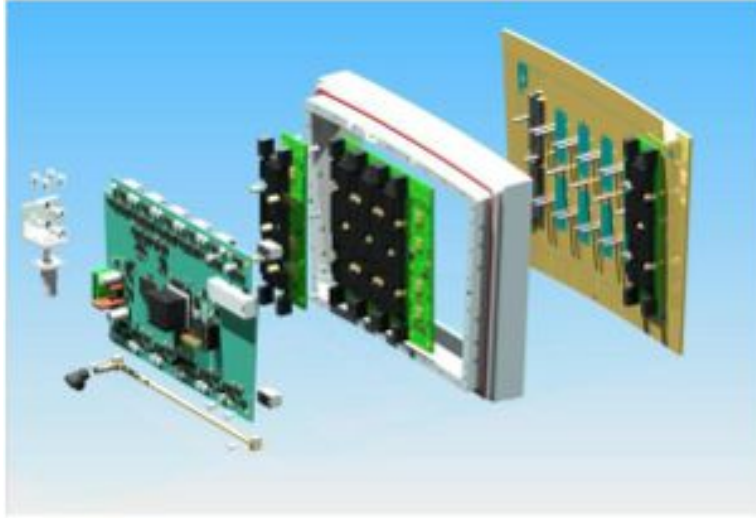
A fully integrated Micromegas panel, where one sees the Module Mezzanine card (FEMi), the air cooling pipe, the Front End Cards equipped of their radiators (in black), all this fixed to the detector PCB.
